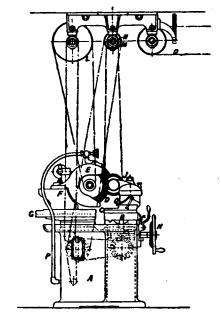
Universal Grinding Machine, 7 in. centres; 3 ft. 6 in. between centres. (H. W. Ward & Co., Ltd., Birmingham.)
